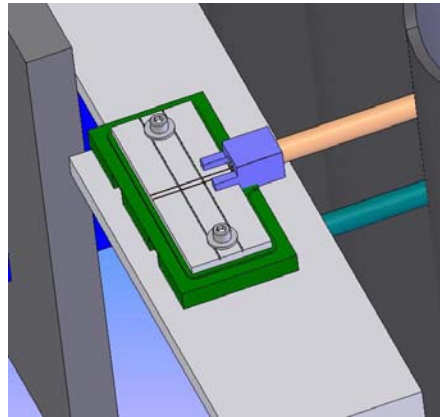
Strain sensor assembly bolted to weld pad
